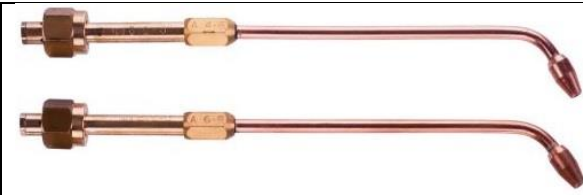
Nozzles attachment for brazing (sizes 2 to 5) for acetylene or propane combustion gas (Source: Perkeo)
